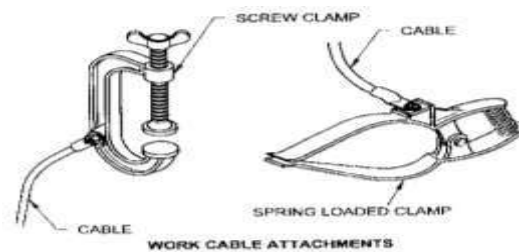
Earth Clamp (Handbook on Welding Techniques)
